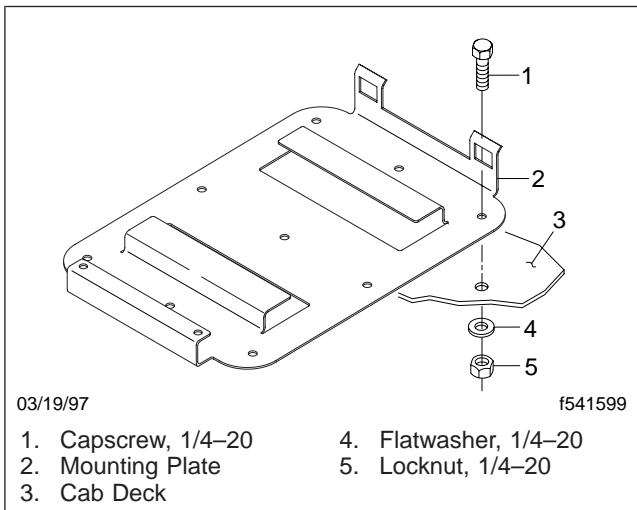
, Removing the Mounting Plate from the Cab Rear Deck
